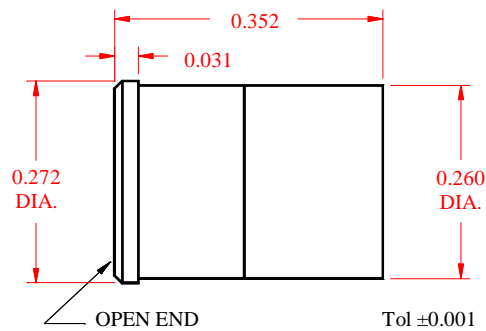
RO Socket # 9872/ 9872LF Mechanical Dimensions
